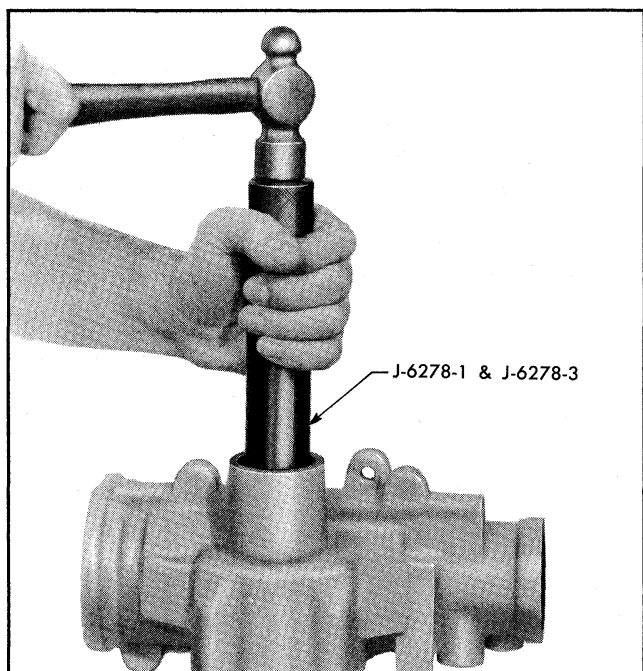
A-22 Installing Pitman Shaft Needle Bearing
